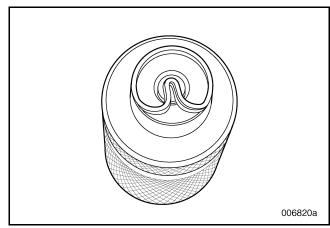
Inserting Teflon<sup>®</sup> Seal in Nose of Insertion Tool (Tool No. J 47357)
